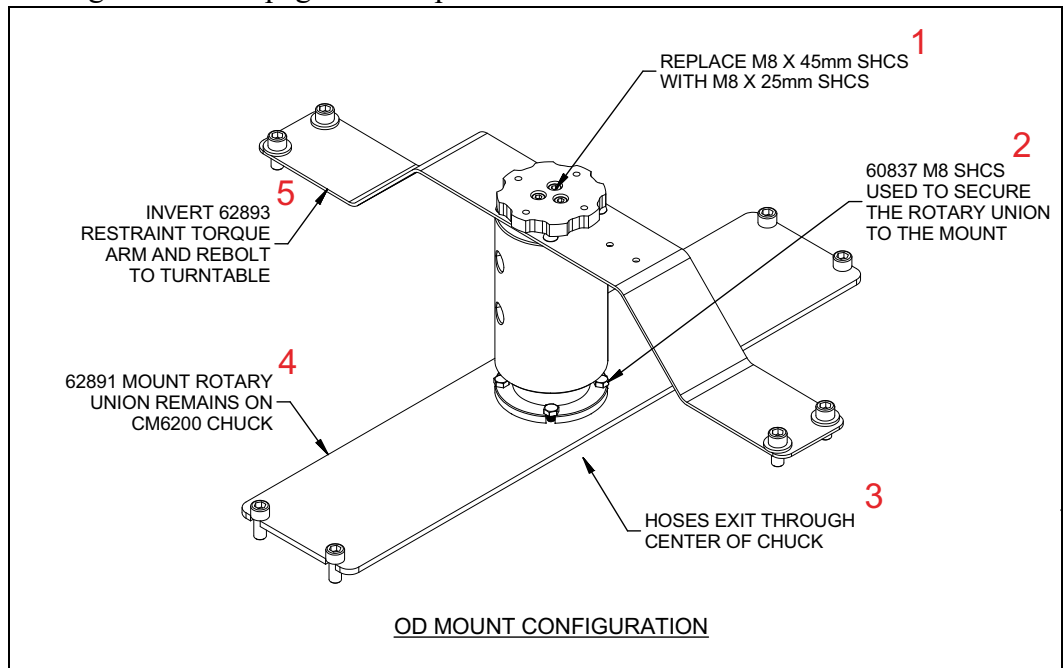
OD MOUNT CONFIGURATION OF THE ROTARY UNION
